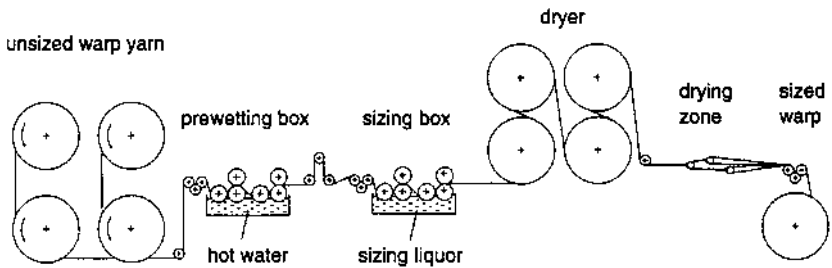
Schematic showing prewetting concept in a conventional two box sizing machine. (From Ref. 38.)
